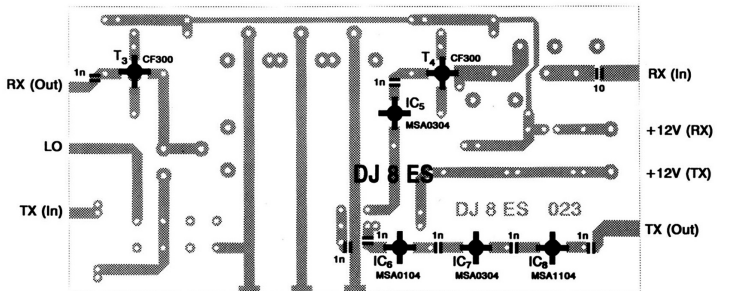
Component layout for the 70cm transverter showing the track side of the PCB and the positions of the SMD components
